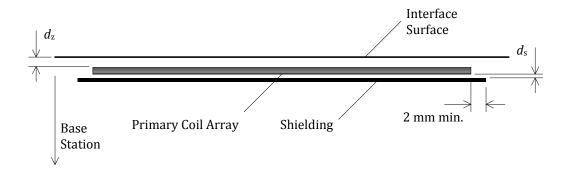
Primary Coil array assembly of Power Transmitter design B1
